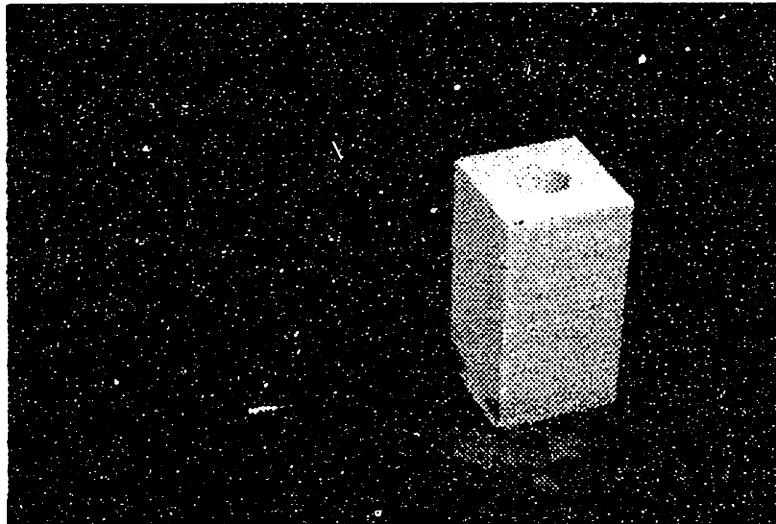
F75 Cobalt-Chrome dog implant casting and 3D printed mold with customized surface texture.
